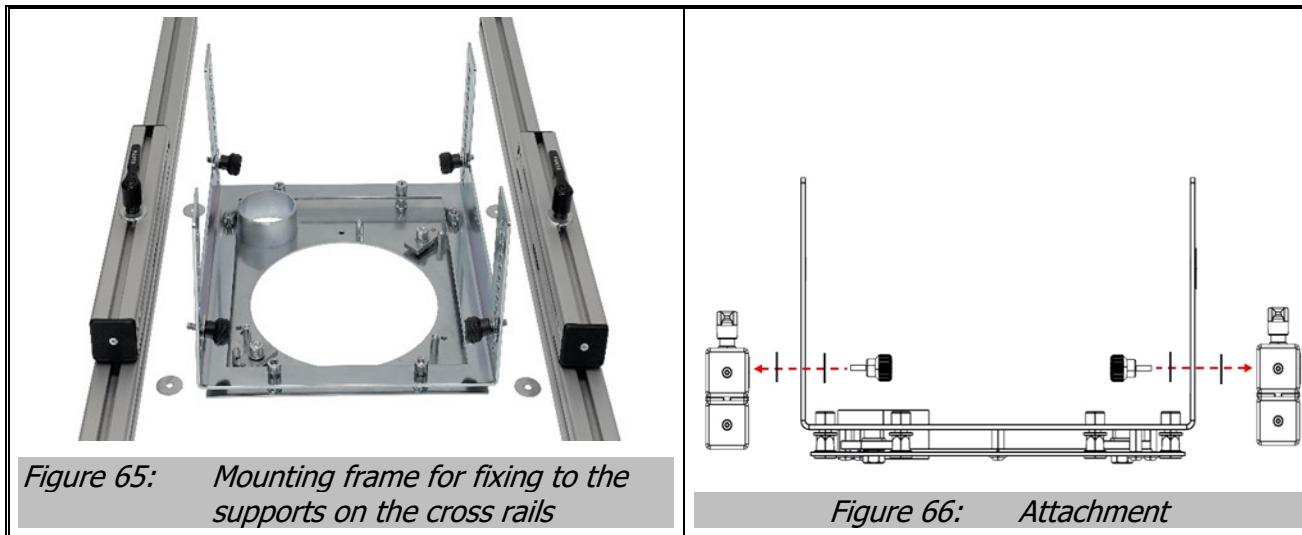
Mounting frame for fixing to the supports on the cross rails
